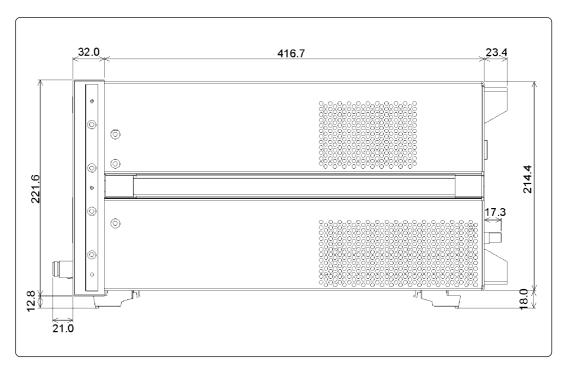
Dimensions (side view, in millimeters, nominal)
